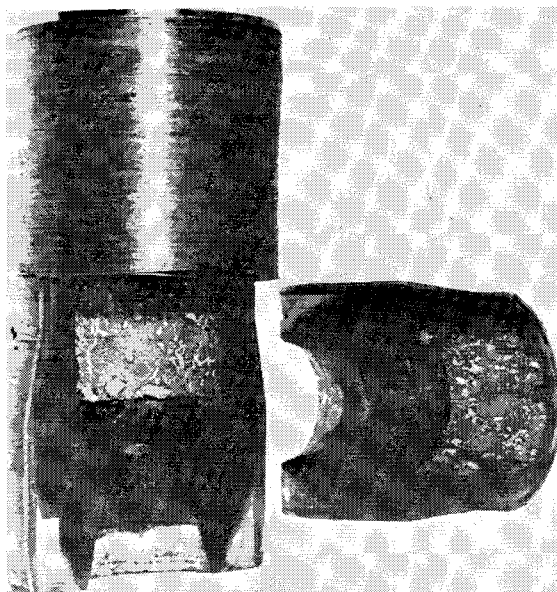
Section of flight-weight, 1750-lbf-space-thrust engine after test.
